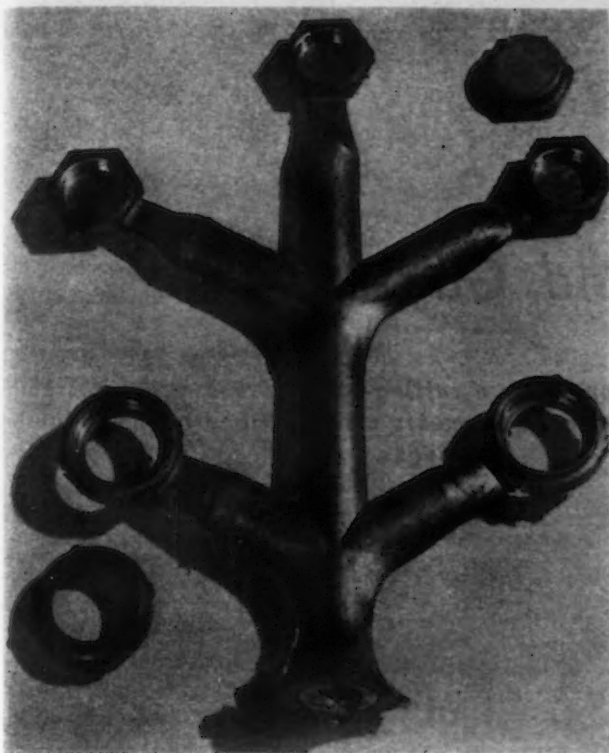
Gate of diecasting, the lower ones being threaded ring sockets for Lord mounts. At top are cap nut castings with cast thread going clear to bottom.
